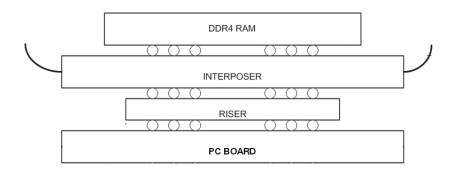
PC board, riser (or optional Grypper socket), interposer, and DRAM stack up
